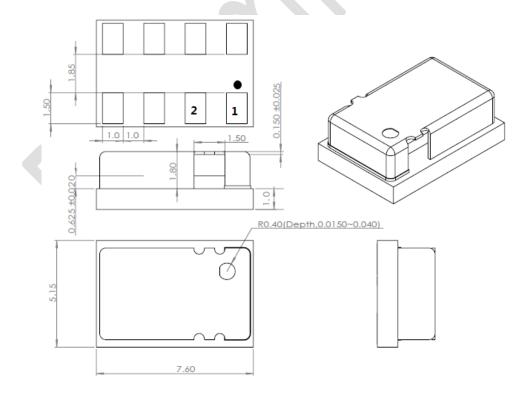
MFP257B1C\_1 Mechanical Drawing
